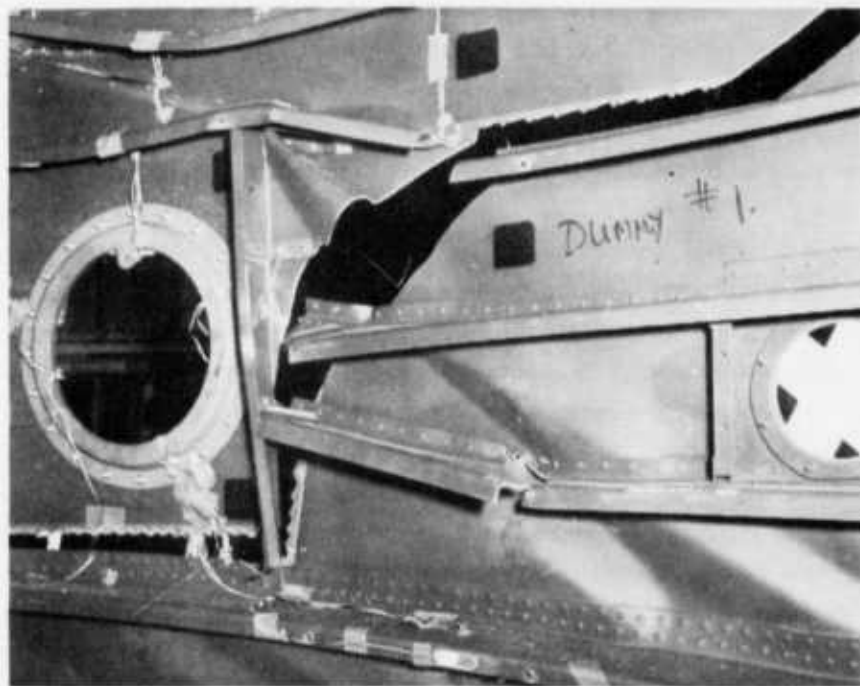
INSIDE VIEW OF FAILED STANDARD RIVETED DUMMY PANEL
